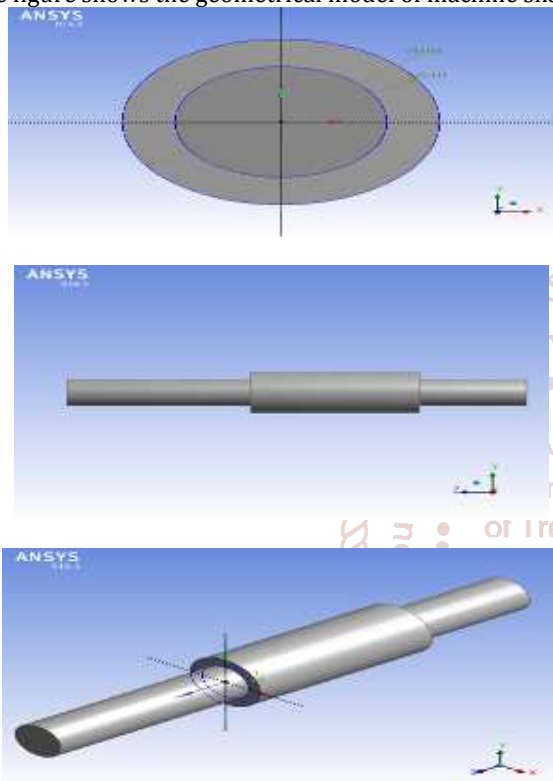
Geometry of shaft in 2D and 3D with dimension in mm.
